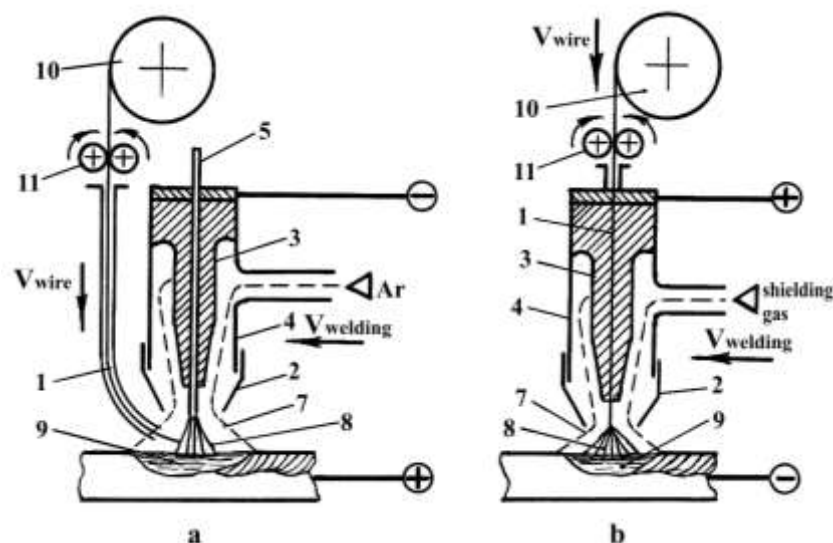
Semi-automatic shielding gas welding with non-consumable (a) and consumable (b) electrode: 1 -wire; 2-nozzle; 3-guide sleeve; 4- torch; 5-W-eletrode; 7-shielding atmosphere; 8-arc; 9-welding bath; 10-cassete; 11 – rollers for moving of wire
